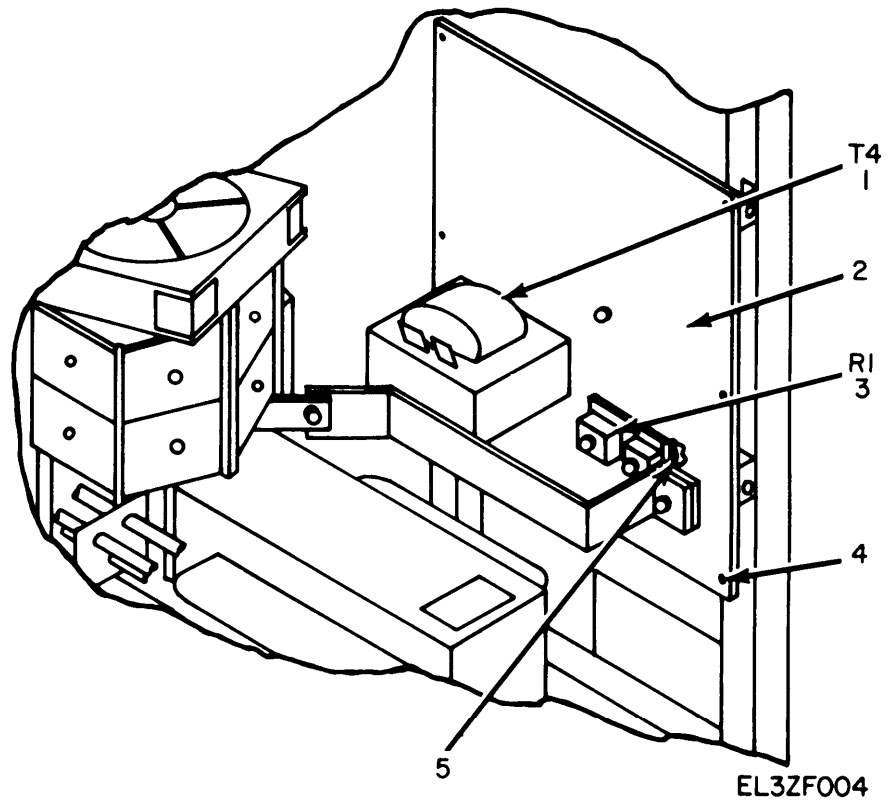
Power Supply PP-4606A/G, Component Plate Assembly.
